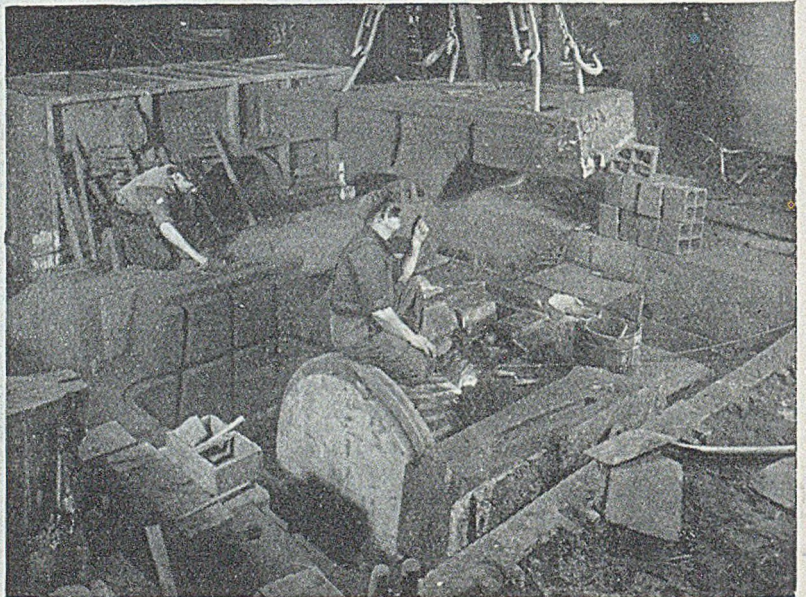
Assembly and Finishing of a Bottom Half Low-pressure Turbine Cylinder Mould, prepared from a Skeleton Pattern.
